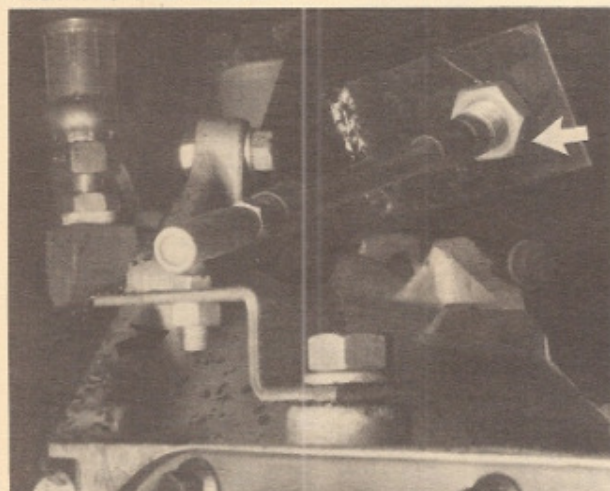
SHIFT CABLE REMOVAL — Remove the transmission shift cable by removing the nut from the stud at the shift lever. Also, remove the large nut at shift cable and bracket at the bellhousing.
